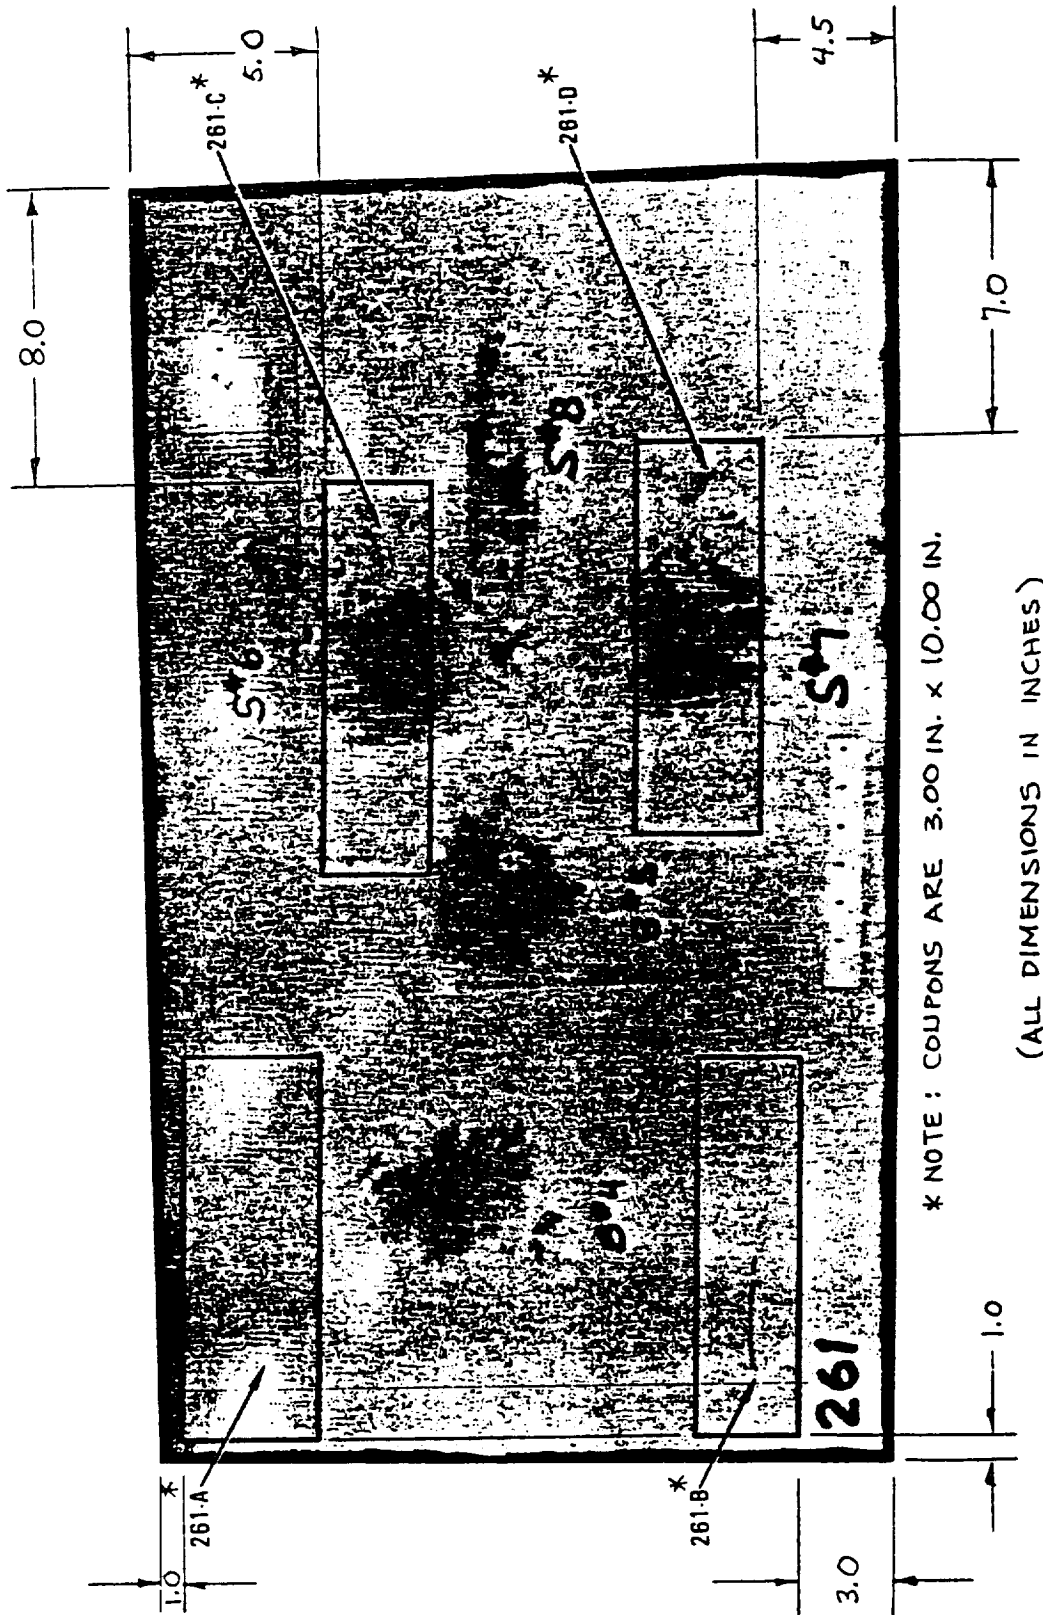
Damaged and Undamaged Compression Test Coupon Locations from Panel 261.
